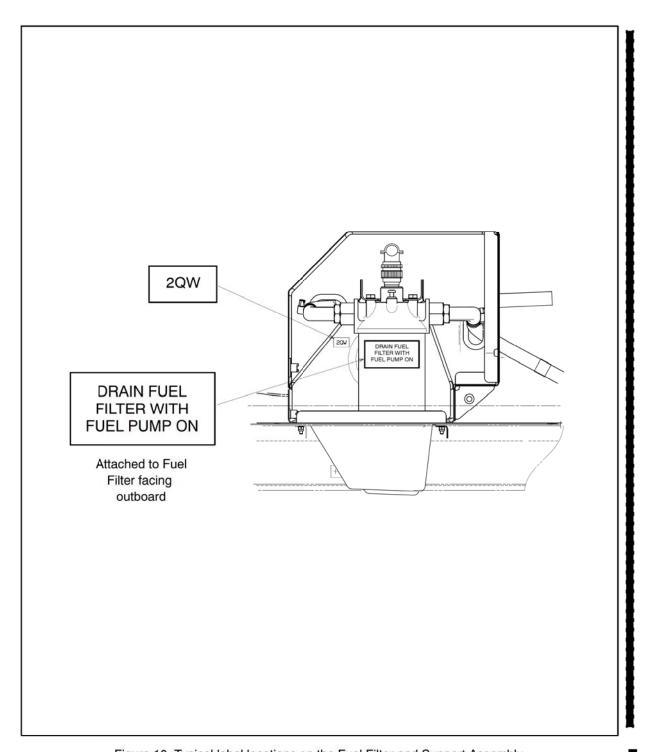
Typical label locations on the Fuel Filter and Support Assembly
